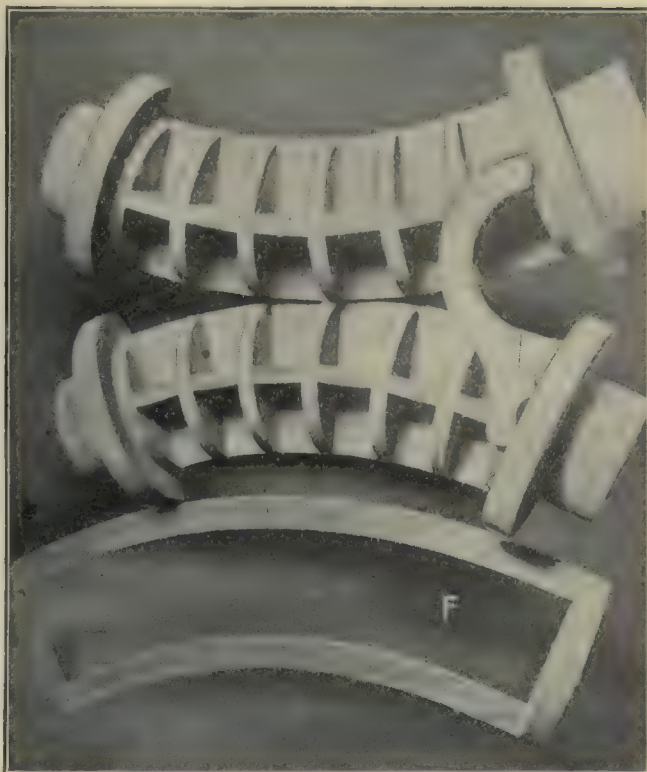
PATTERN PARTS FOR A SINGLE PIPE BEND
